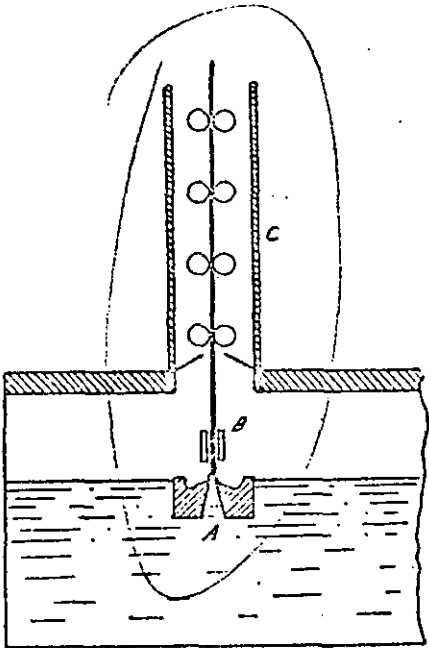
Fourcault process continuous flat sheet drawing machine. A. Depressed debiteuse; B. Sheet coolers; C. Drawing machine and vertical lohr.
